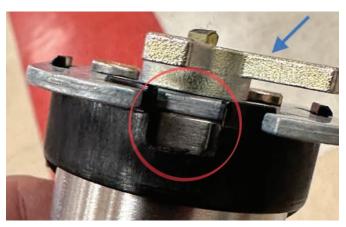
The arrow is pointing to the thread locker residue that came out after the author used a tap.
